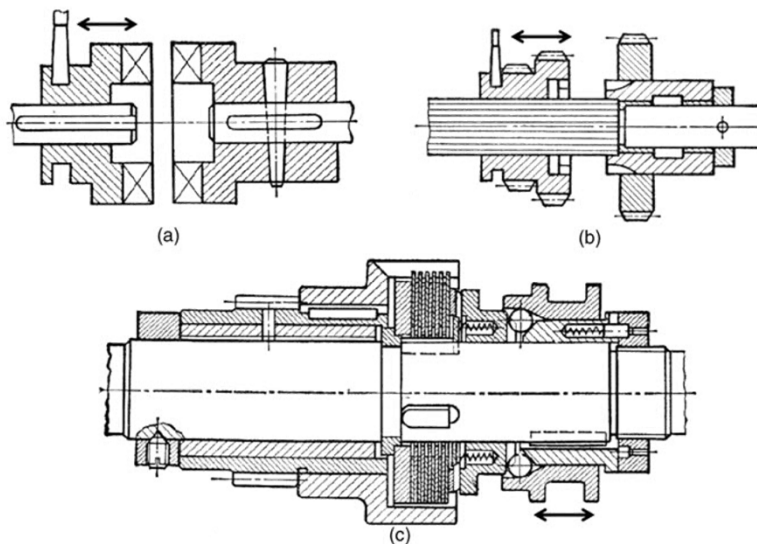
(a) Claw clutch, (b) toothed clutch, and (c) friction clutch. (From Chernov, N., *Machine Tools*, Mir Publishers, Moscow, 1975. With permission.)
